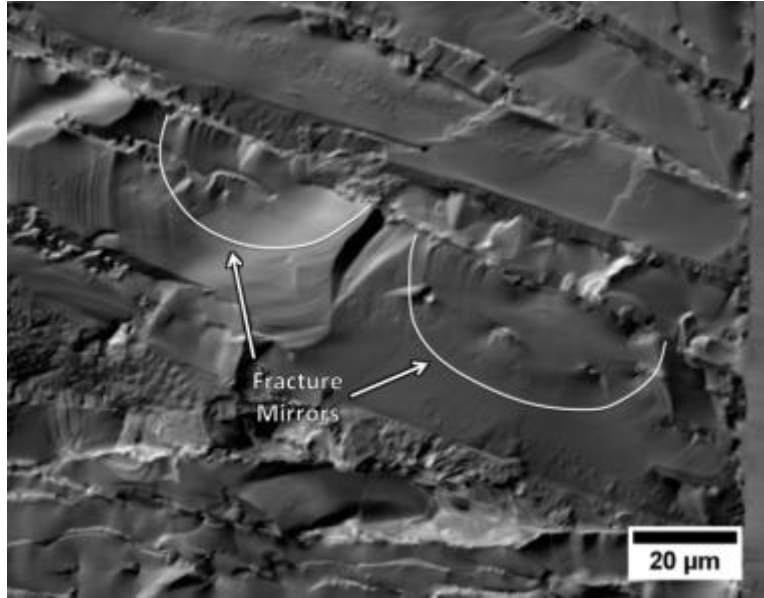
Multiple fracture mirrors were observed in one ZrB_2 grain in a PPAW weld.
